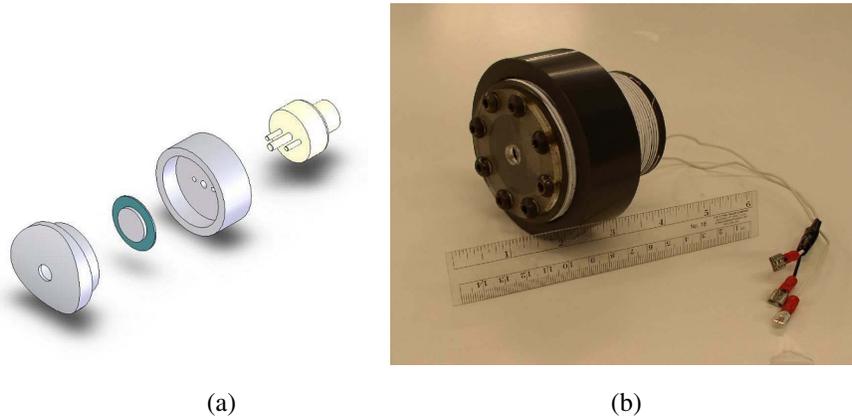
CU Boulder Synthetic jet prototype [13], [14]: (a) Plunger and solenoid assembly. (b) Actual fabrication of the synthetic jet actuator.
